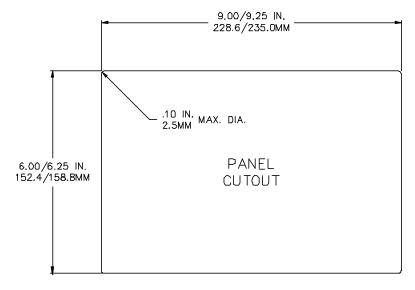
460 Panel Mount Cut-Out Dimensions
